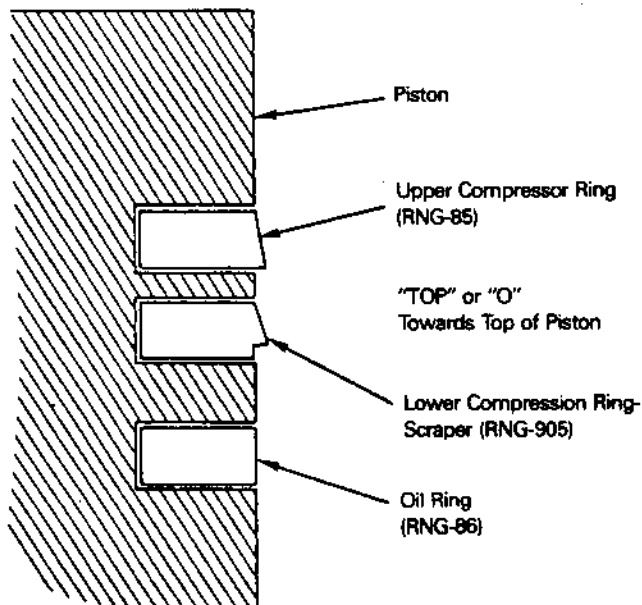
Replacement Piston Ring Set (RNG-77) for 3-Ring Pistons
